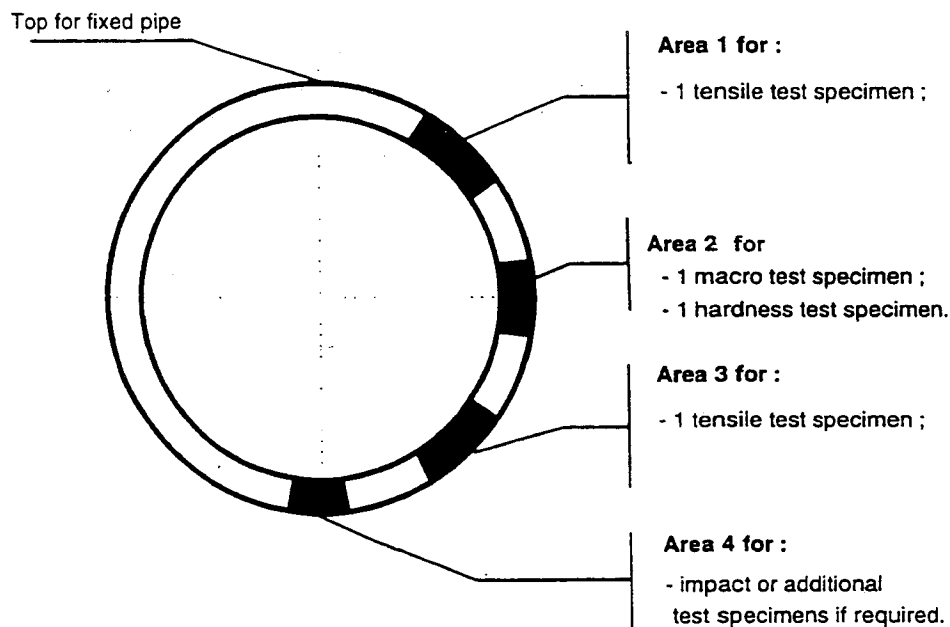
Location of test specimens for a butt weld in pipe - Downwards welding
